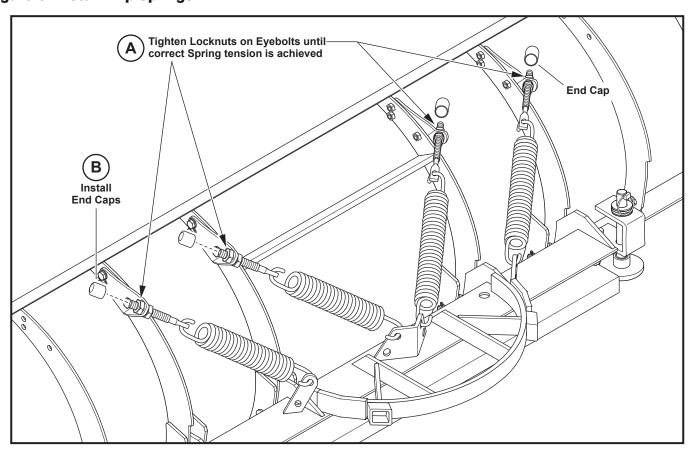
Trip Spring Installation - Adjustable Trip Performance
